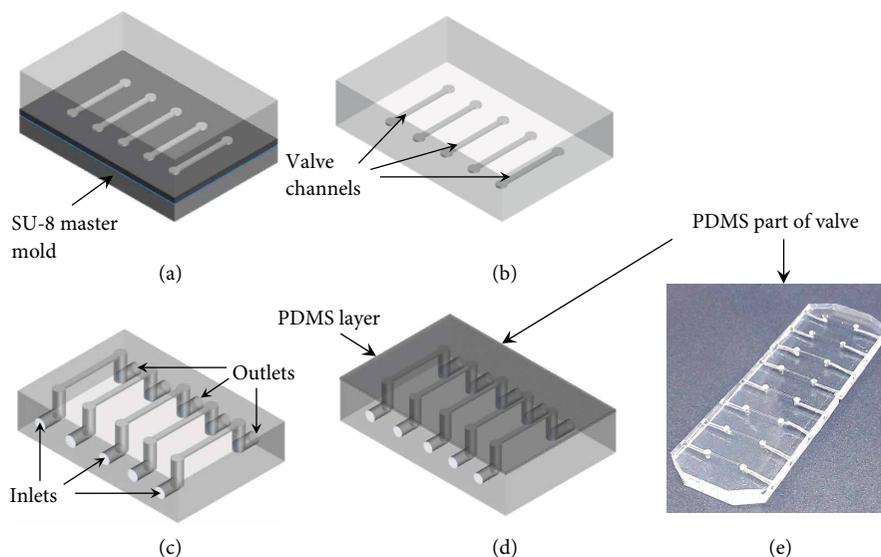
Fabrication of PDMS parts by rapid prototyping technique. (a) Pouring fresh PDMS on SU-8 mold; (b) Releasing PDMS channel from SU-8 mold after curing; (c) Making inlets and outlets of channel by PDMS tool kits; (d) Bonding a PDMS film on top of valve channel; (e) PDMS part of the valve.
